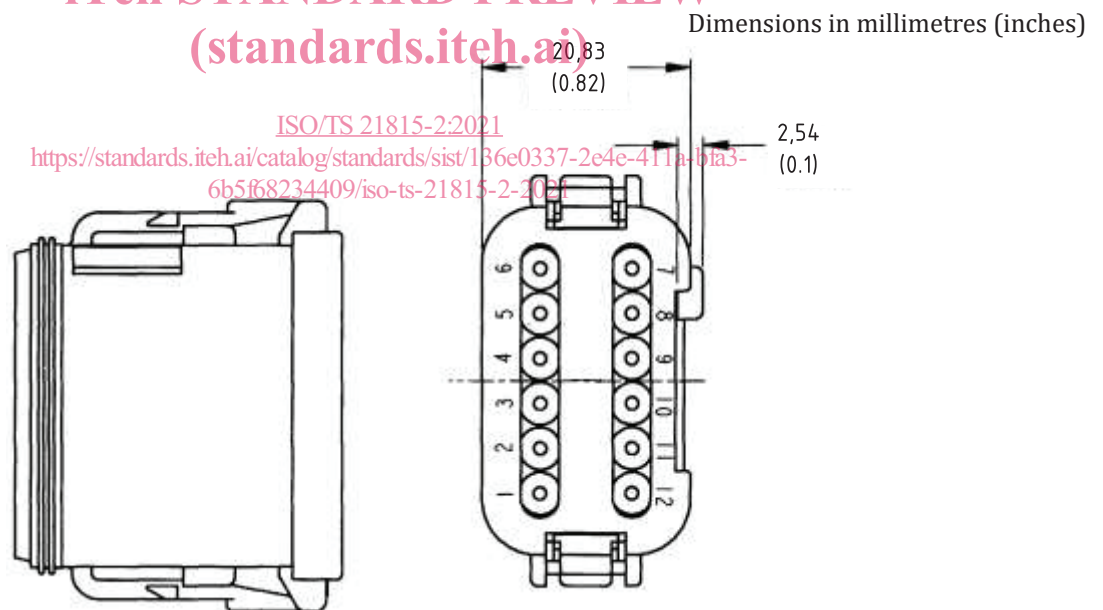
Machine physical connector - Deutsch DT-series 12 pin, part DT06-12SC-EP06 (Key C)
